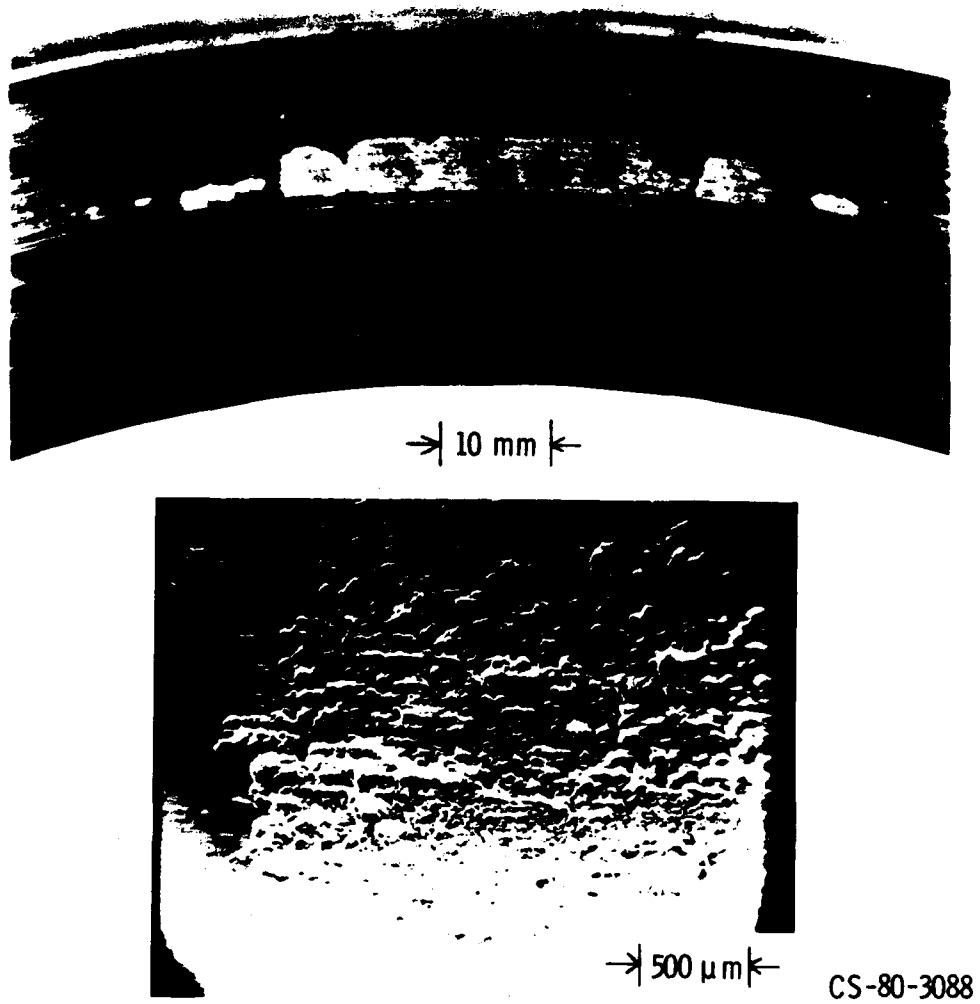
Peeling failure on cup raceway surface after 569 hours with standard design bearing run at 12,500 rpm
